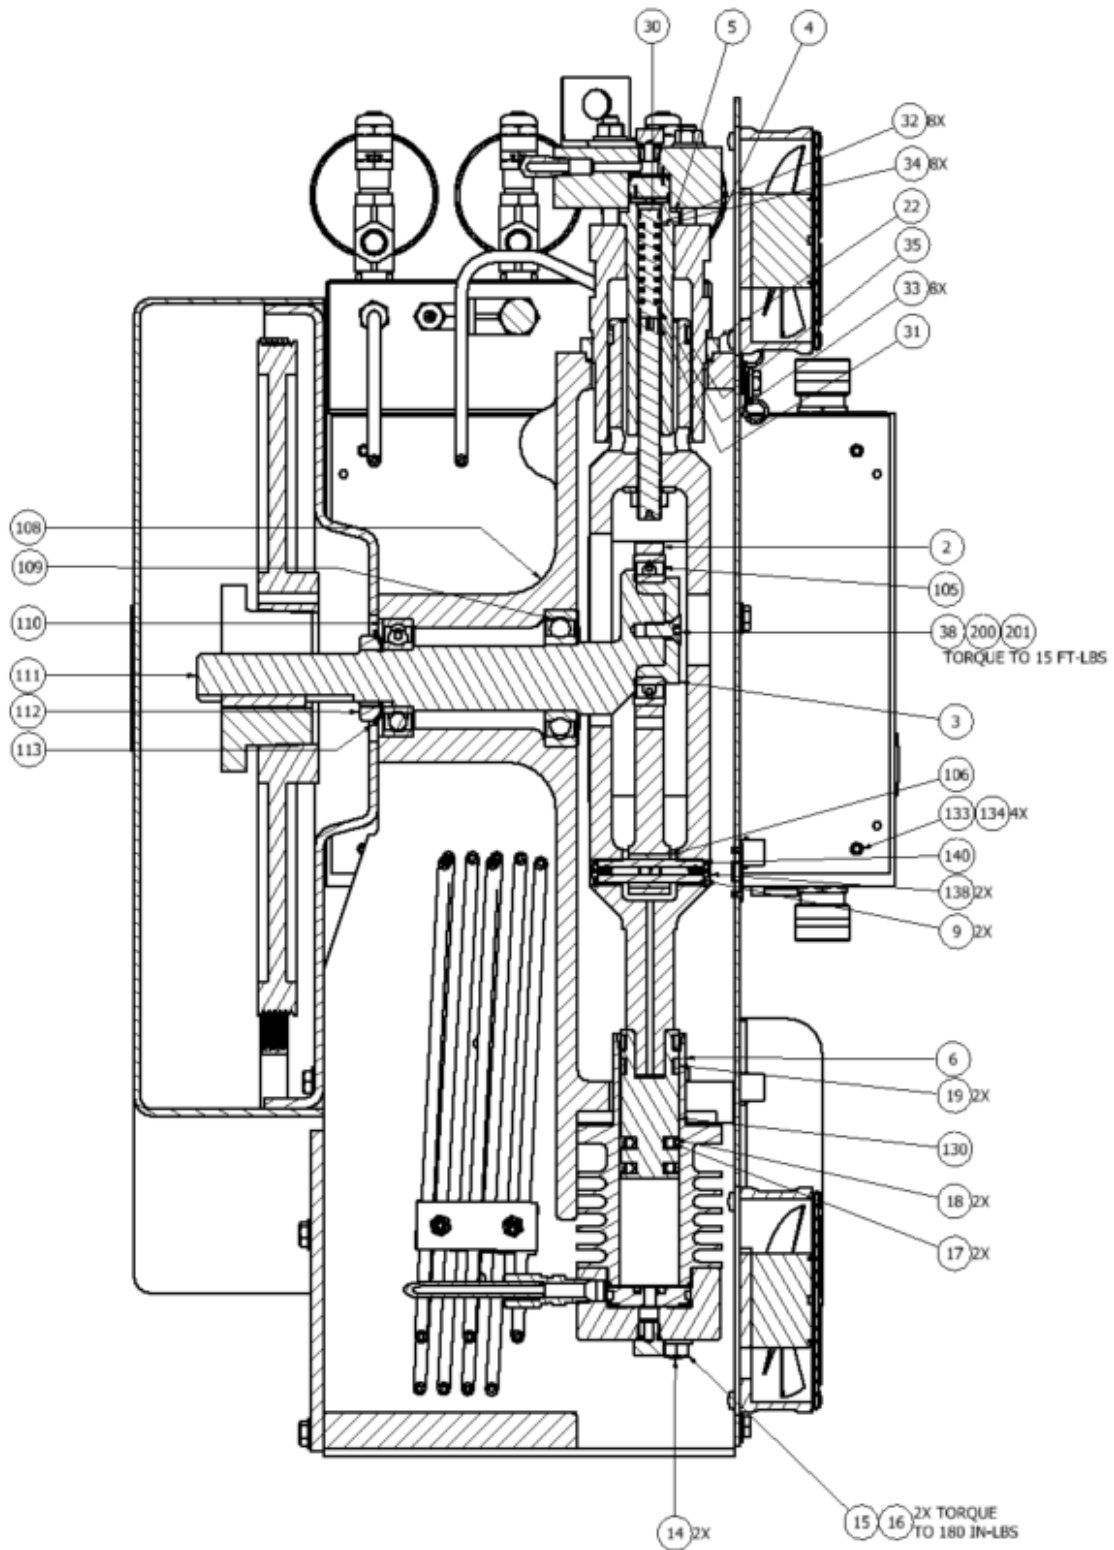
COMPRESSOR CROSS SECTION, PUMP DETAIL
